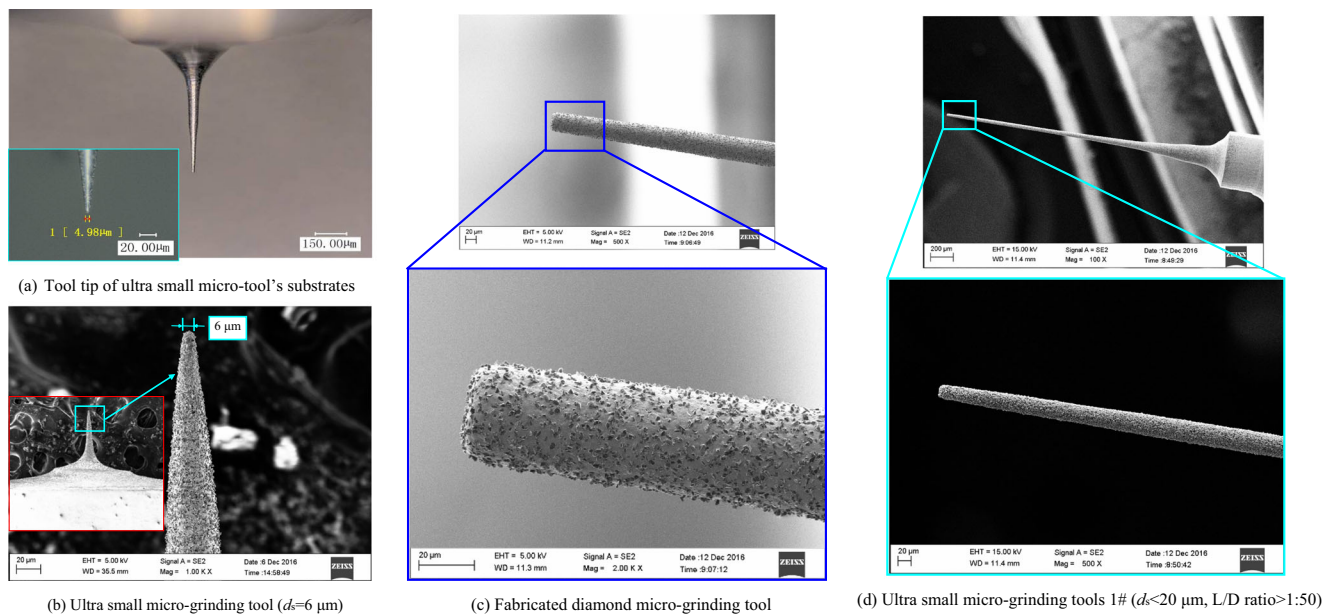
Ultra-small micro-grinding tools fabricated in this study. a Tool tip of ultra-small micro-tool substrates. b Ultra-small micro-grinding tool ($d_s = 6\ \mu\text{m}$). c Fabricated diamond micro-grinding tool. d Ultra-small micro-grinding tool no. 1 ($d_s < 20\ \mu\text{m}$, L/D ratio $> 1:50$)
